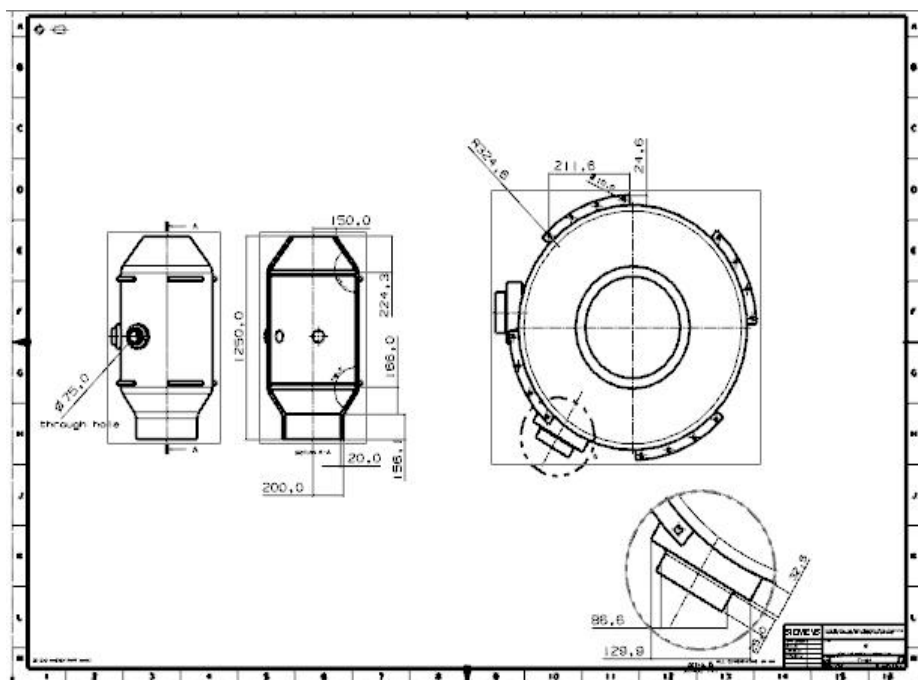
shows the 2D drawing of Combustion chamber (C.C) Outer Case
